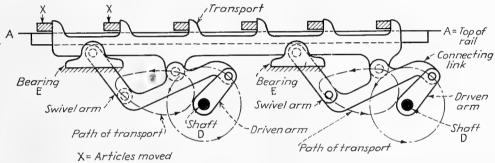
Here is shown a simple form of link motion which imparts a somewhat egg-shaped motion to the transport. The forward stroke is almost a straight line. The transport is carried on the connecting links. As in design in Fig. 422, the shafts D are driven in unison and are supported in the frame of the machine. Bearings E are also supported by the frame of the machine, and the rail AA is fixed. The details of operation can be understood readily from the figure.
